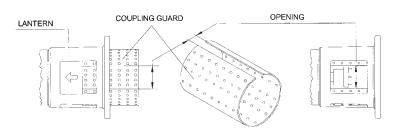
PREPARING TO ASSEMBLE THE MONOBLOCK DESIGN
